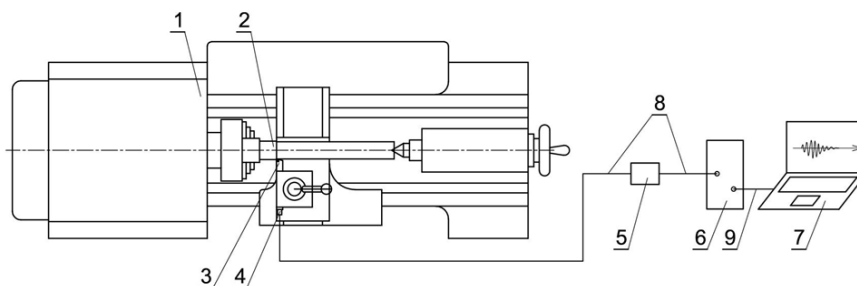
Schematic of the experimental setup. 1) Lathe, 2) Workpiece, 3) Turning tool, 4) AE sensor mounted on the tool holder, 5) Pre-amplifier, 6) AMSY-6 measurement system, 7) Data acquisition computer, 8) Signal cables
